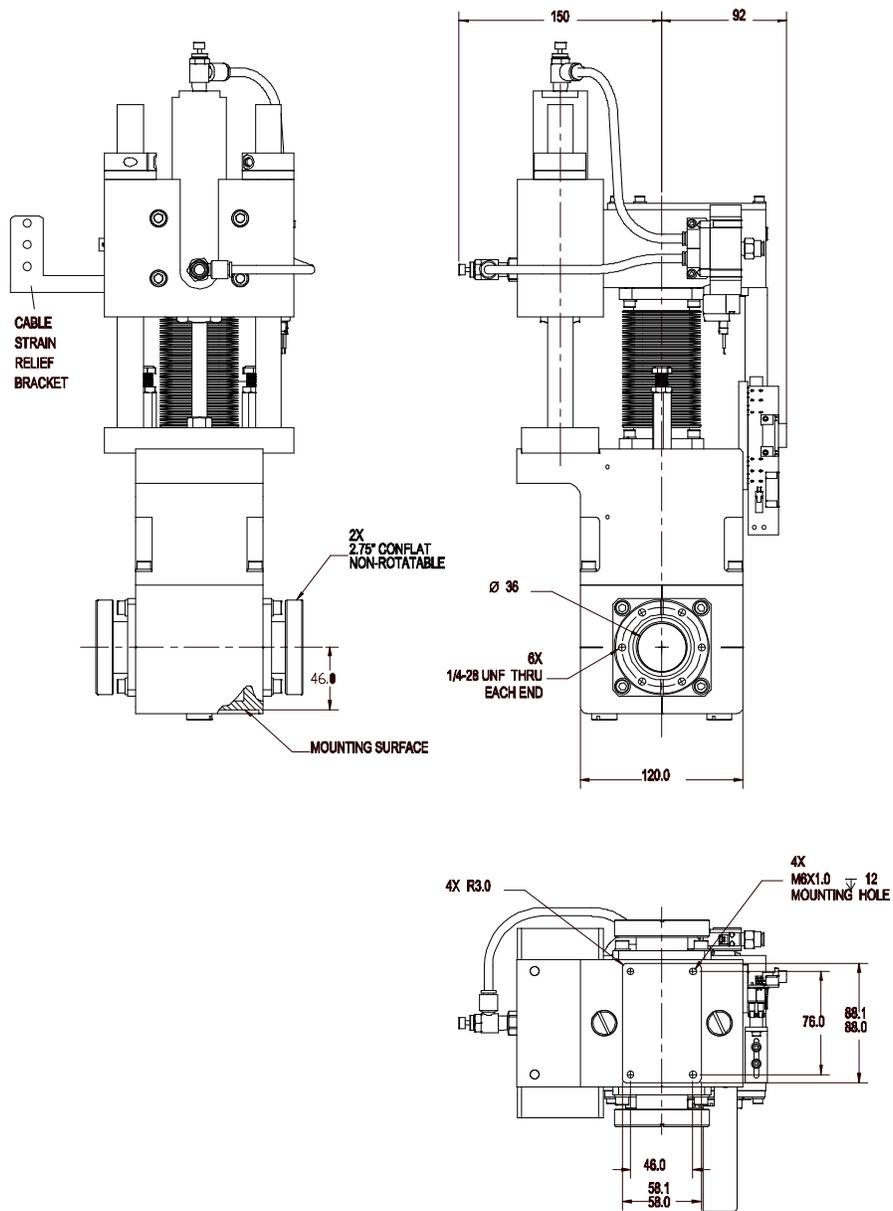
BPM layout; sensor out of beam position (bellows extended). Dimensions mm.
